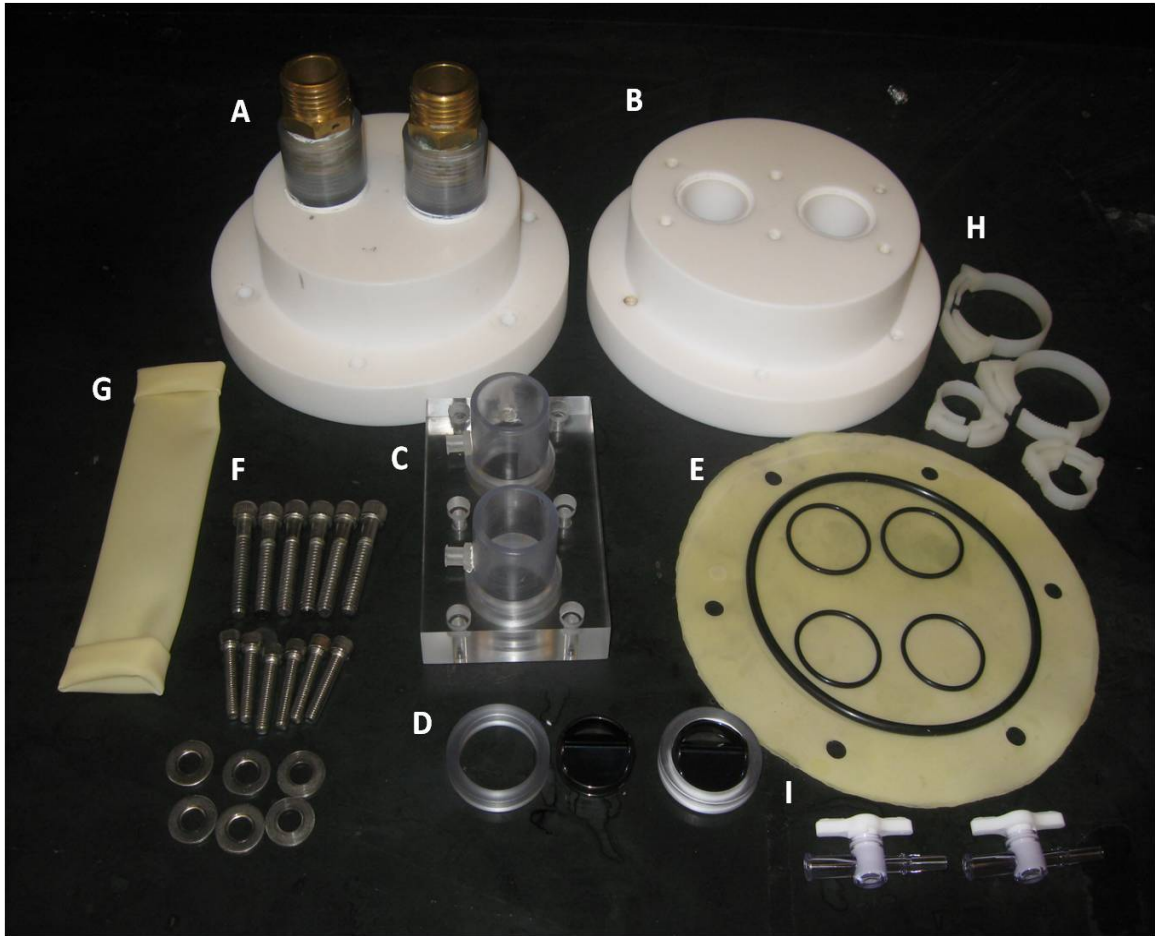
Finished components and readymade parts of the flow chamber. (A) Water chamber. (B) Testing fluid chamber. (C) Transparent valve socket. (D) From left to right, valve housing, St. Jude bileaflet mechanical heart valve, and valve with housing. (E) Diaphragm and different sizes of O-rings. (F) Screws and washers. (G) Folded Penrose tubing. (H) Acetal clamps with different sizes. (I) Luer fittings inserted at filling and sampling ports.
